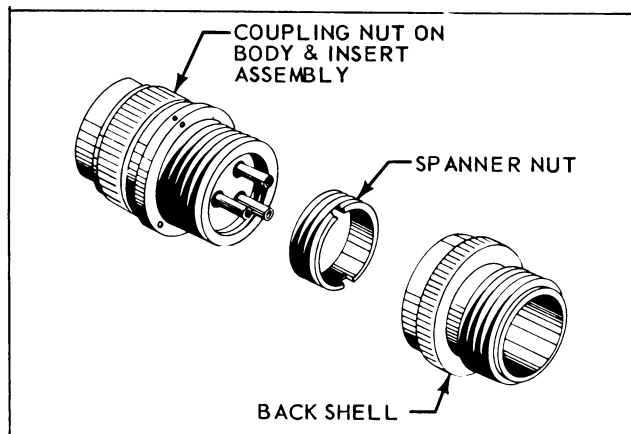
Bendix Fireproof Connector - Partial Disassembly
